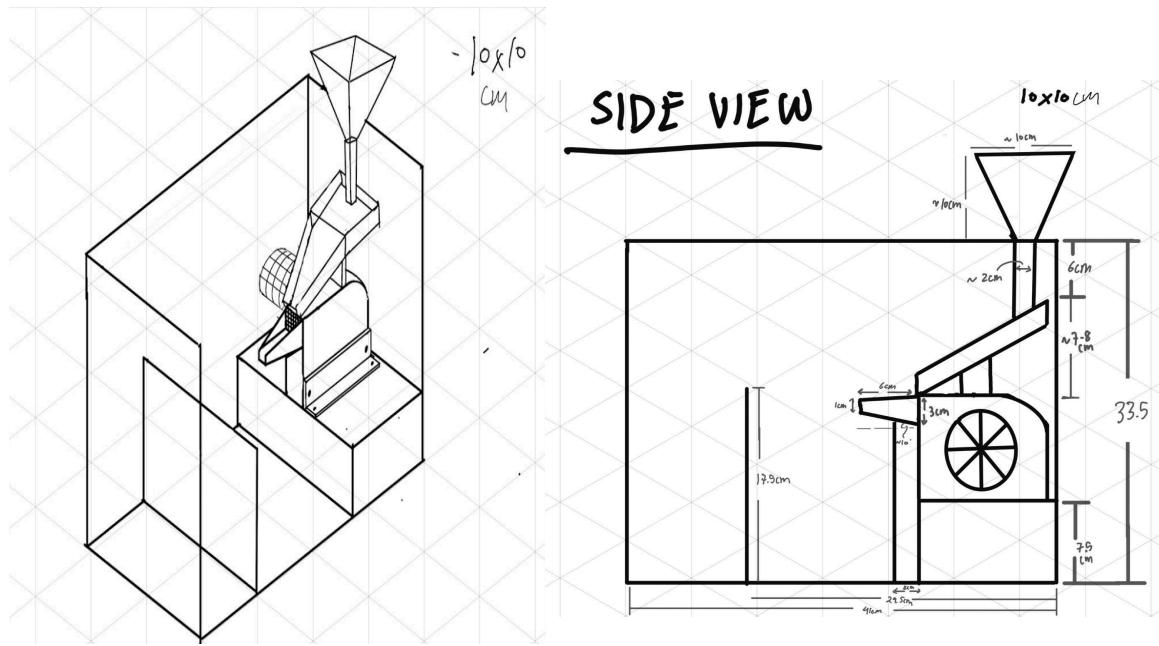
Final Design Prototype Rough Isometric & Side View Drawing
